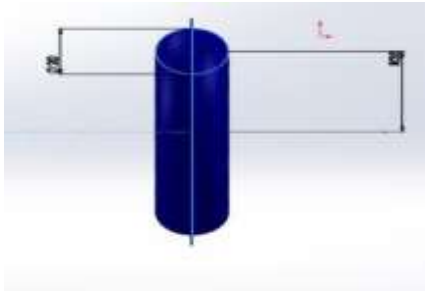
Face geometry as per standard dimension [EN 12756- Mechanical seal,
